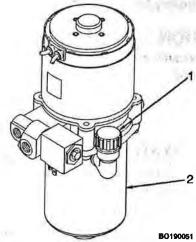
CHECK AND FILL HYDRAULIC TANK
